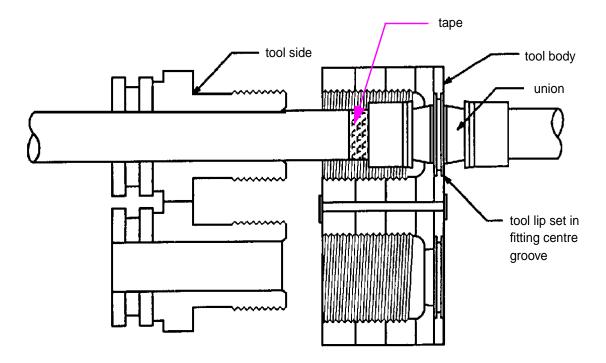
Positioning the Quickfit Mini-Tool around the Fitting
